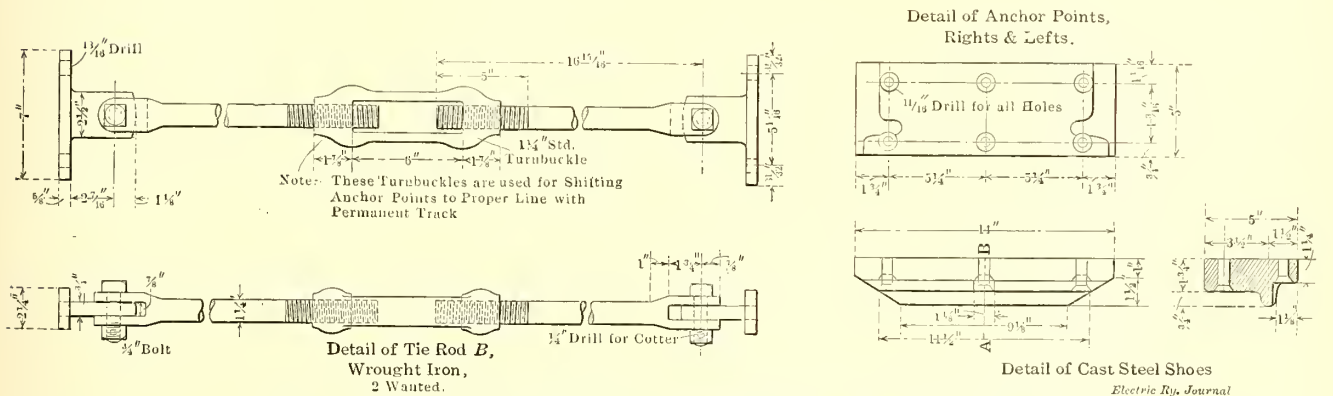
Details of Tie Rod "B," Anchor Points and Cast Steel Shoes
